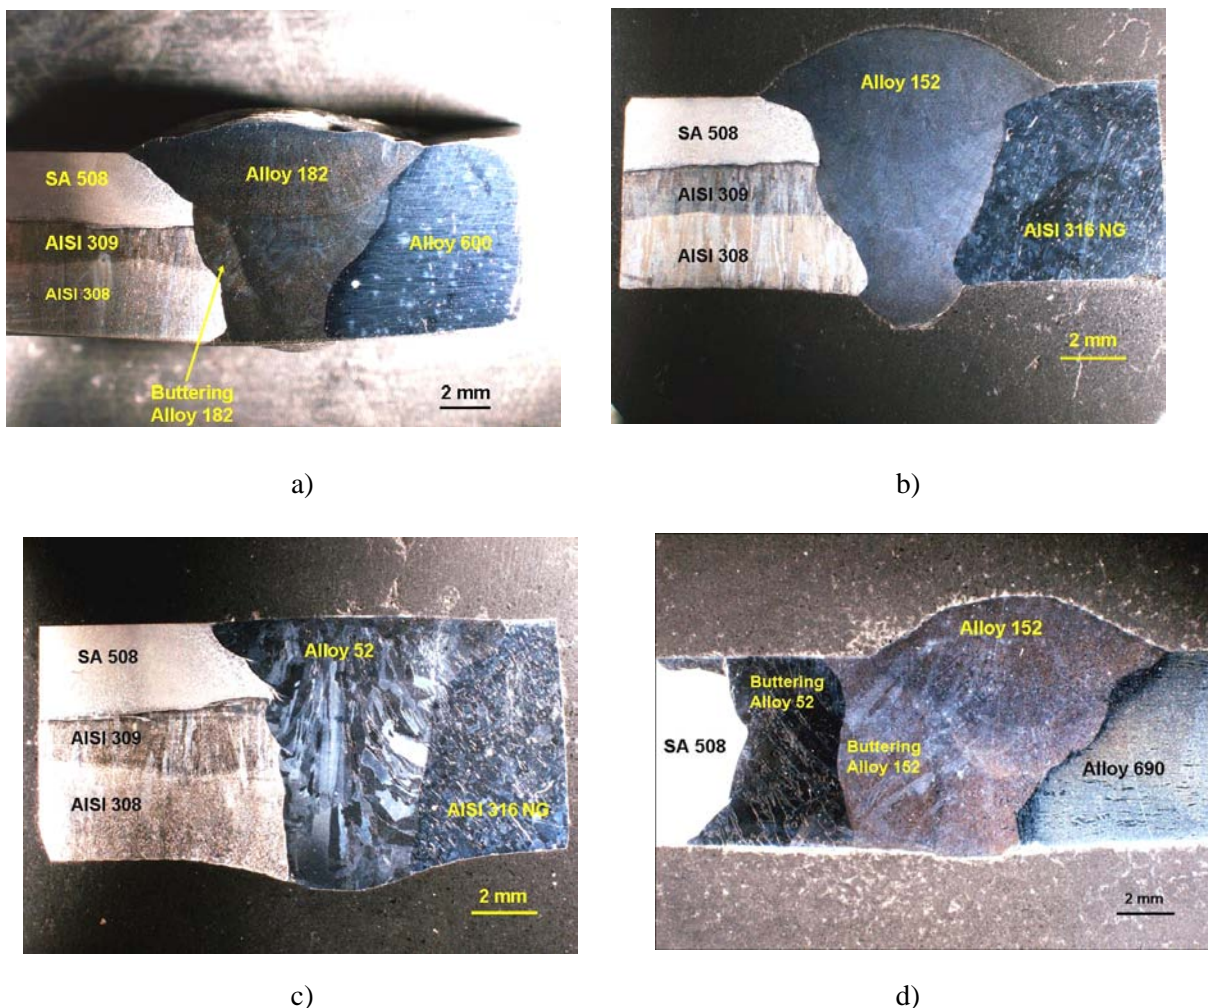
Materials and cross-sections of a) mock-up TV1, b) mock-up TU1, c) mock-up TU2 and d) mock-up TU3 dissimilar metal welds.
